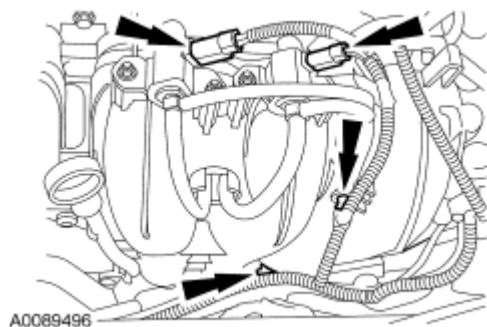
Locating Swirl Valve Electrical Connectors And Pin-Type Retainers
